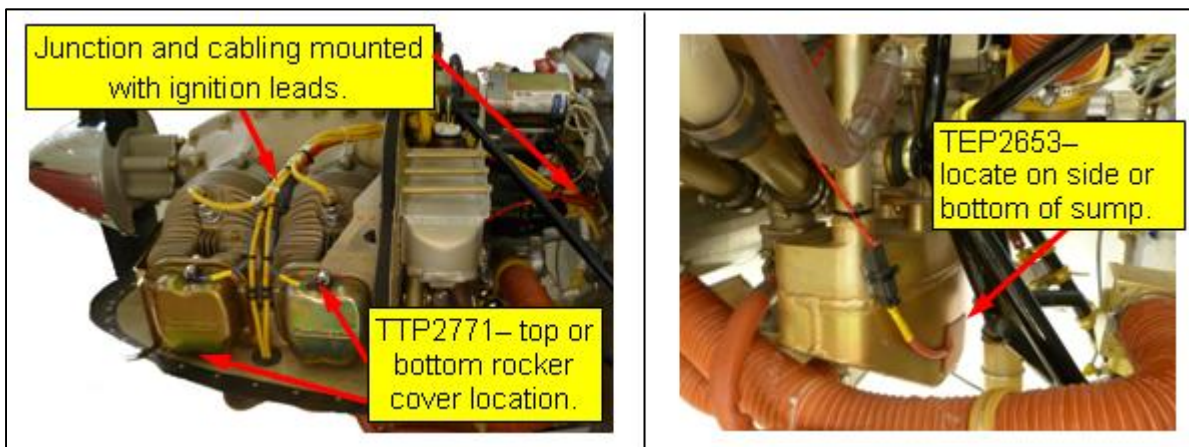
Left, suggested wire routing shown with ignition leads. Right, tank element location with wire routed from junction mounted on ignition leads near engine magnitos. Shore power plug is to be secured to on engine mount with clamps, or oil filler tube with optional bracket (TU01062).
